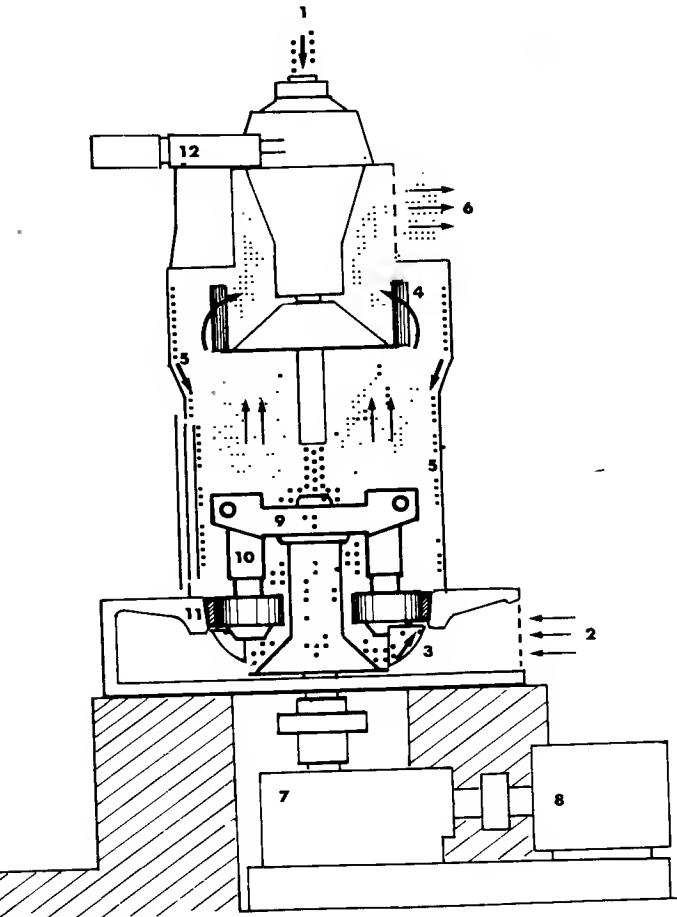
Cross section of an Indutec three-roller mill equipped with a whizzer-separator. 1, Unground rock inlet; 2, recycled air inlet; 3, plow; 4, whizzer blades; 5, recycled coarse particles; 6, air and ground rock outlet; 7, gear; 8, motor; 9, main shaft and spider; 10, pendulum roller assembly; 11, grinding ring; 12, motor and gear for whizzer.
